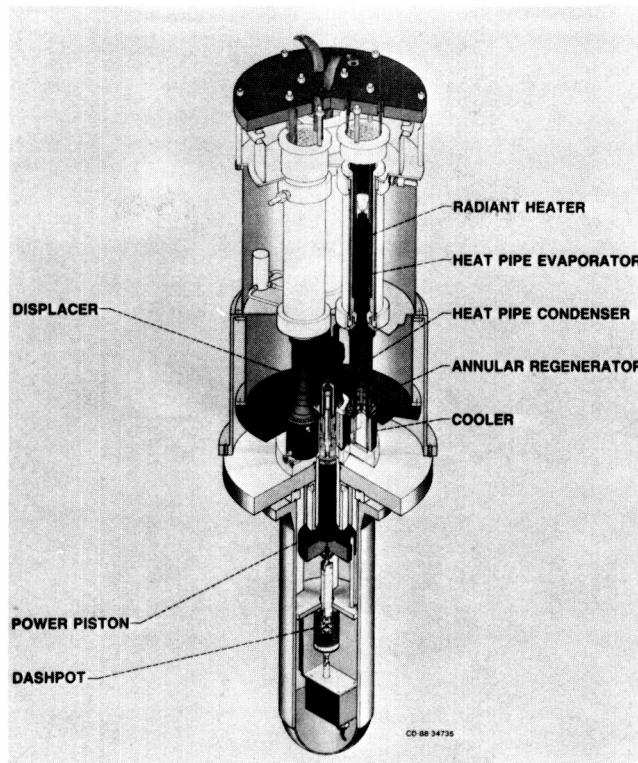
CUTAWAY OF HEAT EXCHANGER TEST ENGINE.
